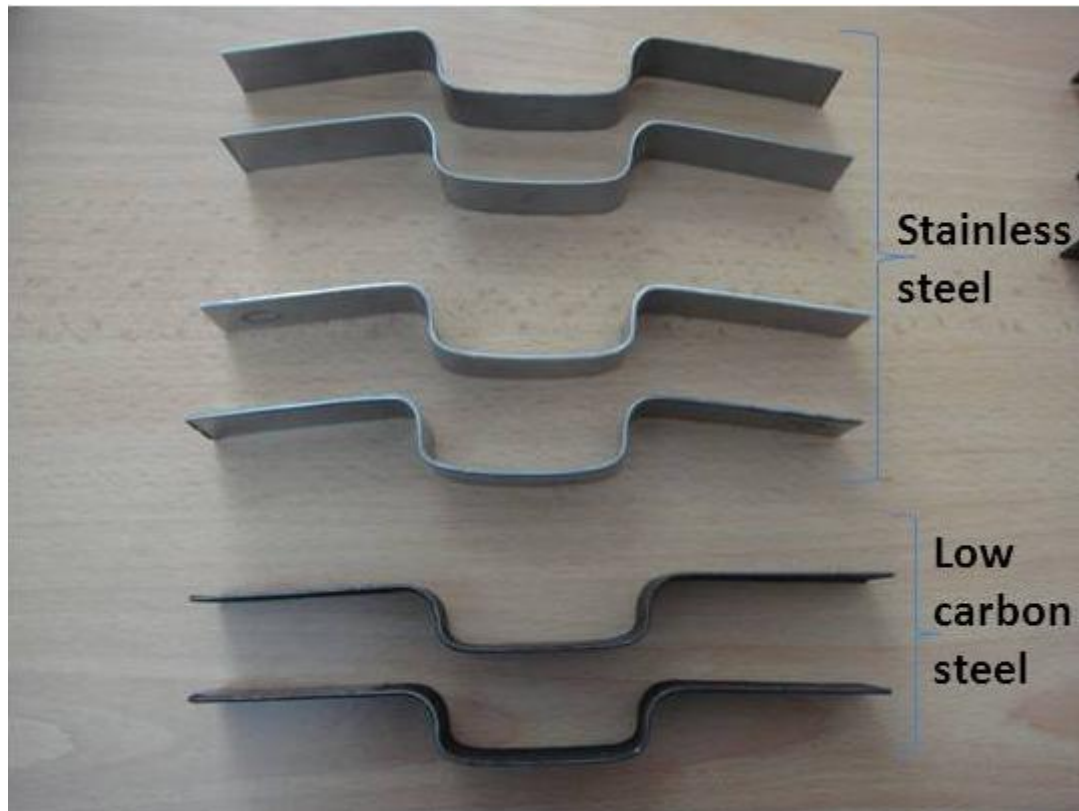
Experimental U-bending parts of stainless steel and cold rolled low carbon steel
